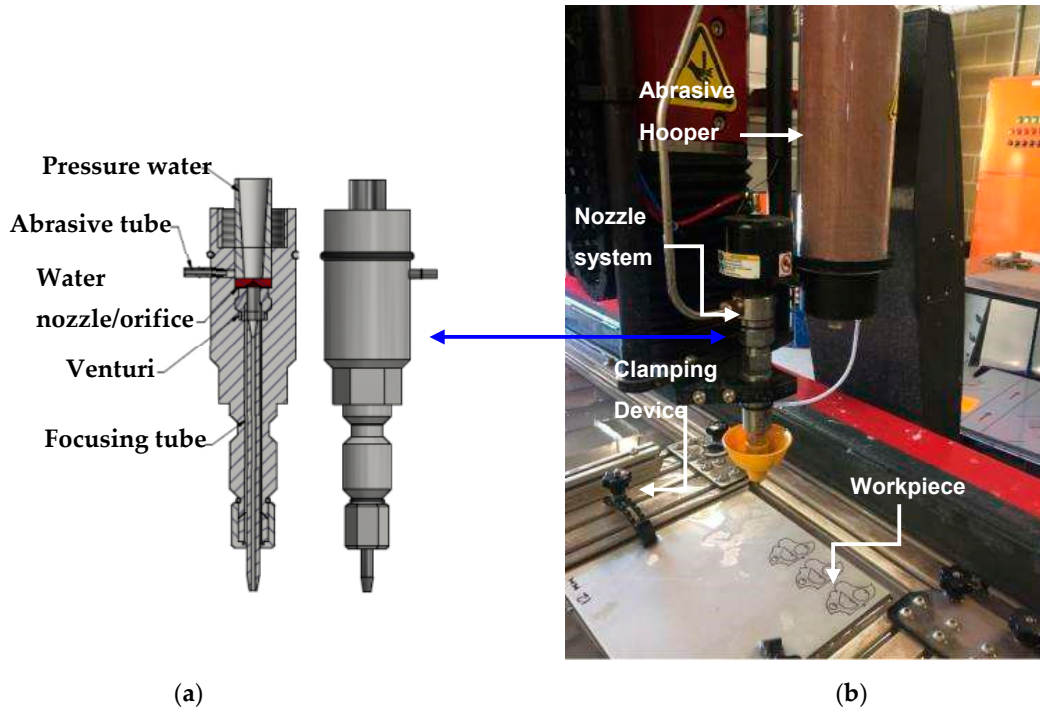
Experimental set-up (a) Schematic diagram of the nozzle system and (b) AWJ cutting head and material positioning.
